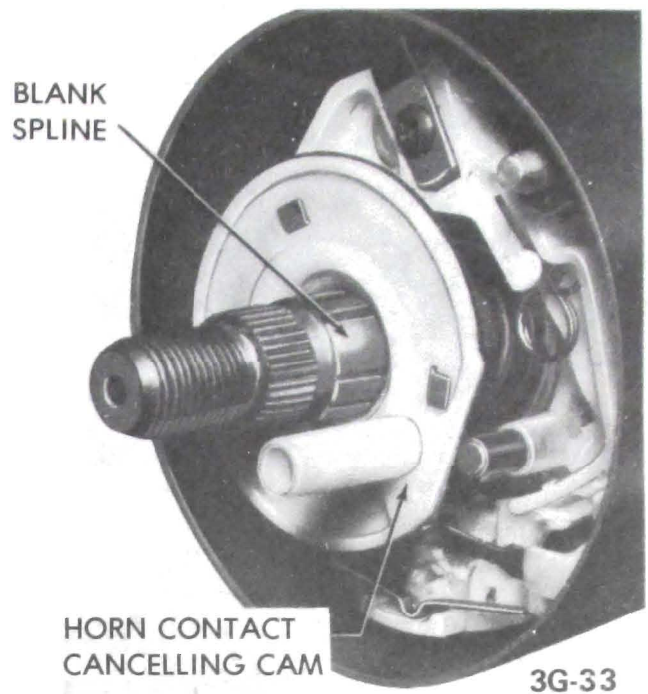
G-33 - Horn Contact - Cancelling Cam Installed
